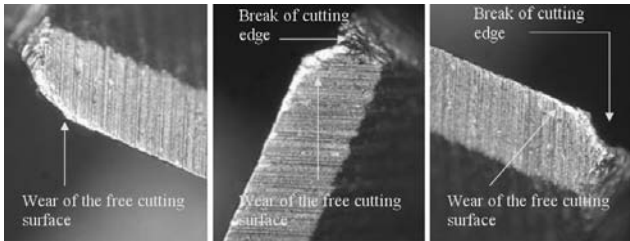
Toll wear on cutting edge by pencil cutter – bed case
